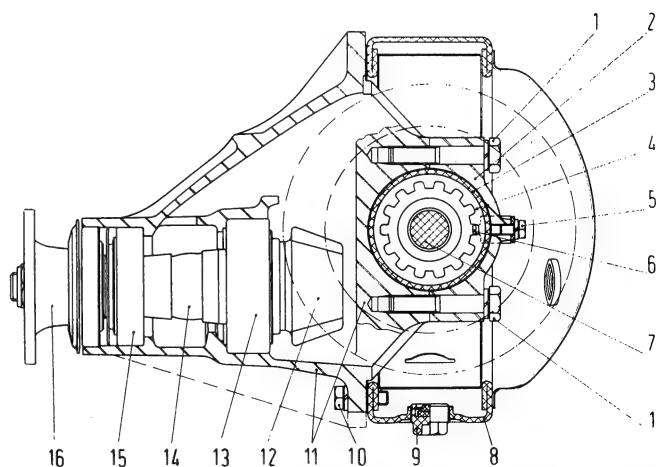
Section view of differential carrier assembly across drive pinion and case bearing adjusters.
